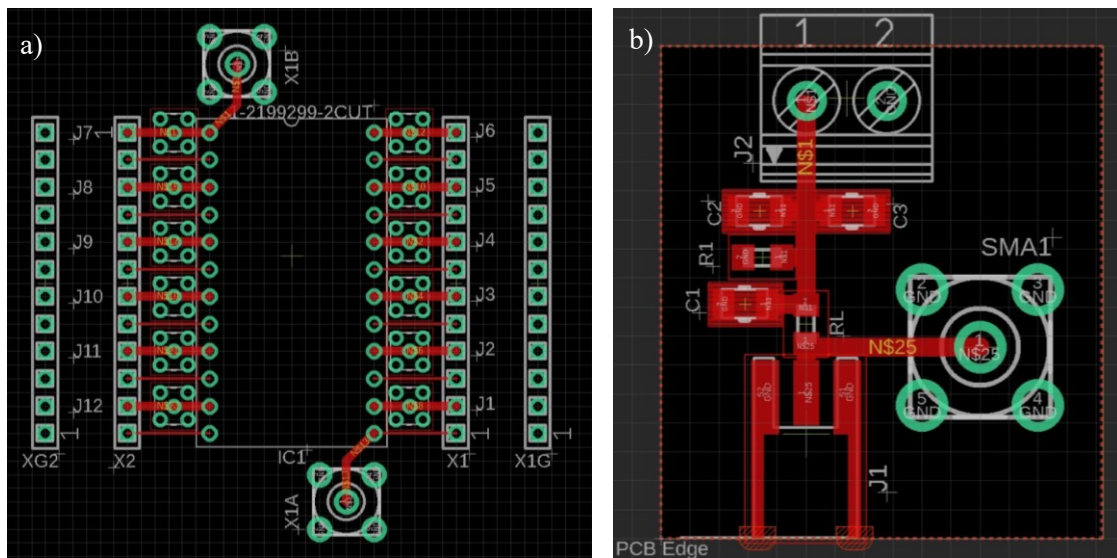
Printed circuit board layout designs for the InP semiconductor nanowire single-photon avalanche diodes (SN-SPADs). a) Modular printed circuit board (PCB) base board which accepts the 24-pin package of the InP SN-SPAD sample chip carrier. b) Passive quenching PCB for operating the InP SN-SPAD for single-photon detection.
